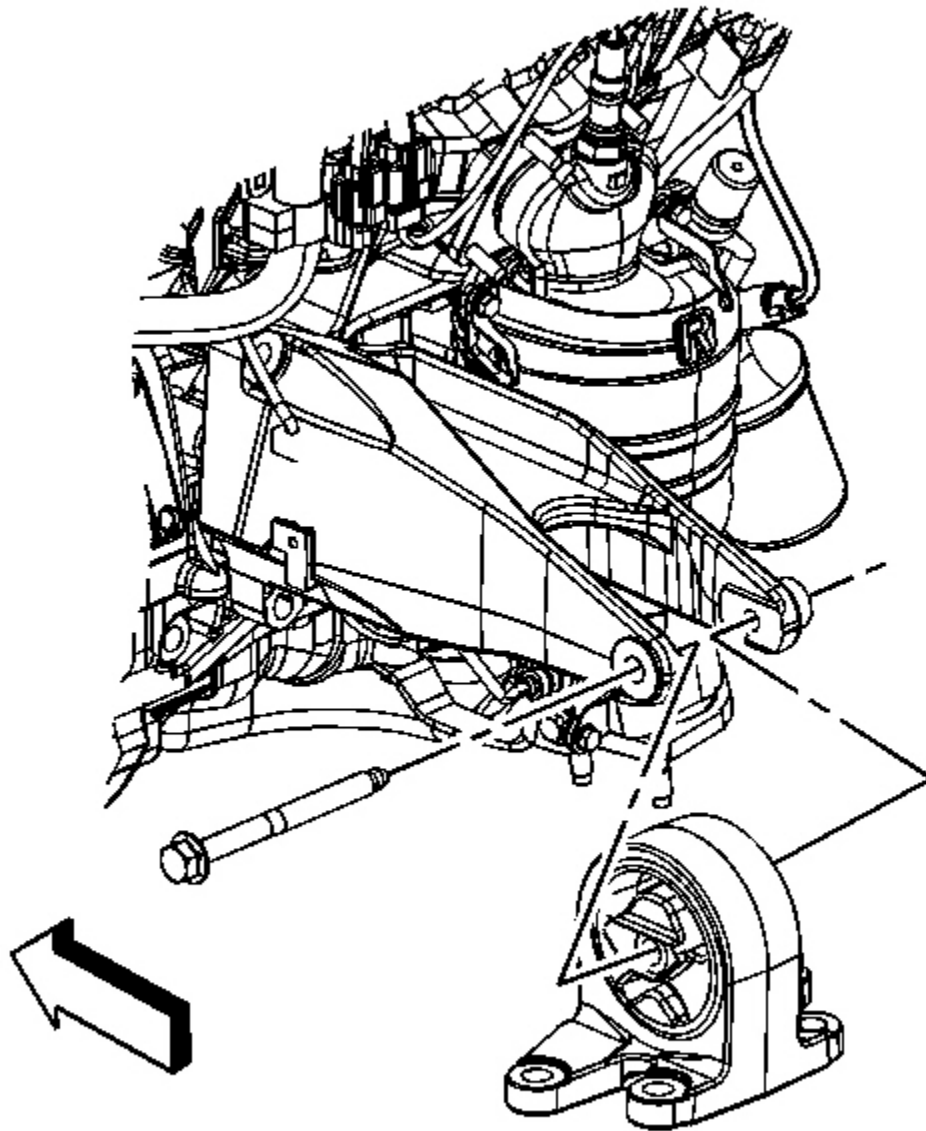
Rear Transmission Mount-To-Bracket Through Bolt
